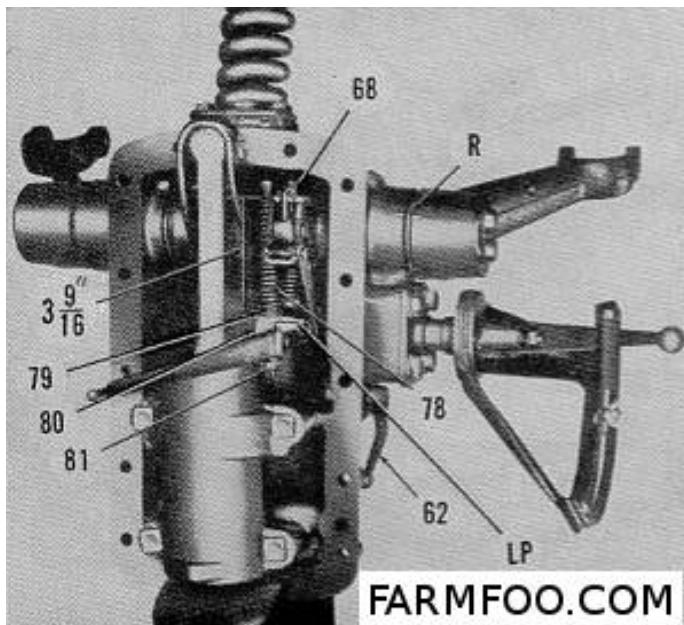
On model 8N, adjust the constant draft control spring to 3 - 9/16 inches length by means of adjusting nut (81).
